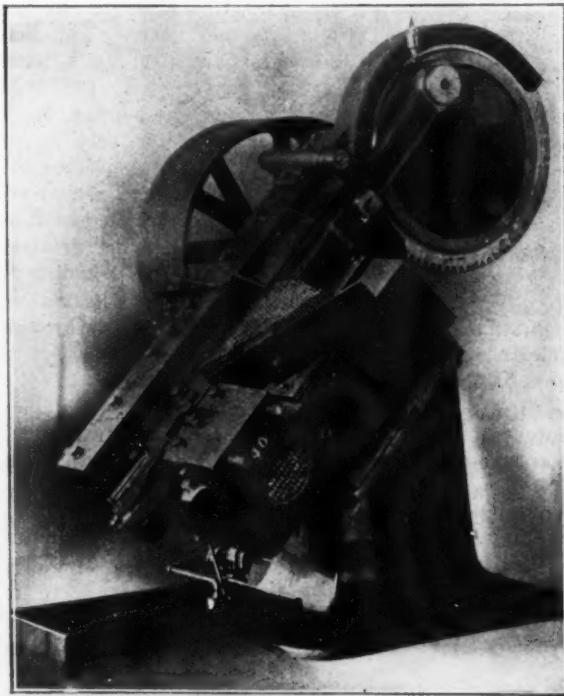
An Inclined Thread Roller for Automatically Feeding Headless Blanks.
